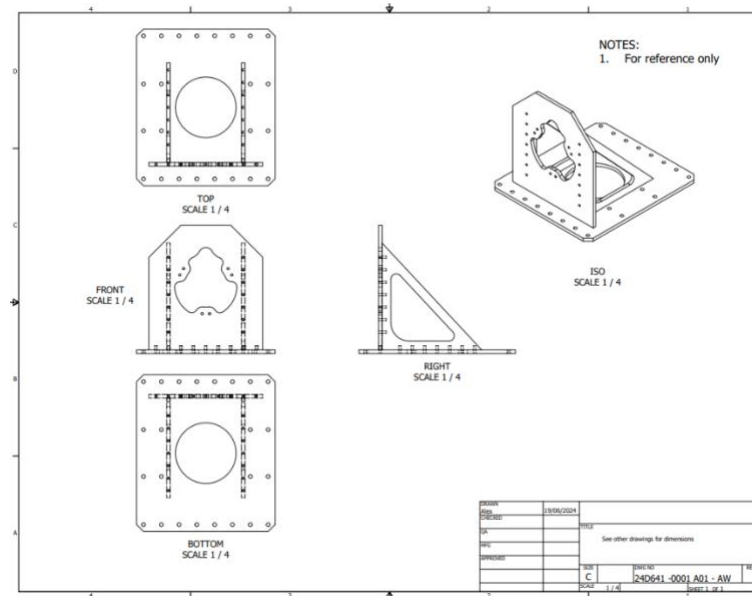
, Drawings for fabrication of L-bracket used to support engine during testing.
